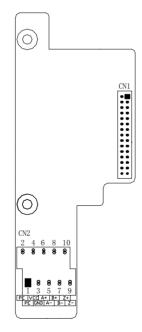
EN-PG01, EN-PG02 Outline dimension drawing
